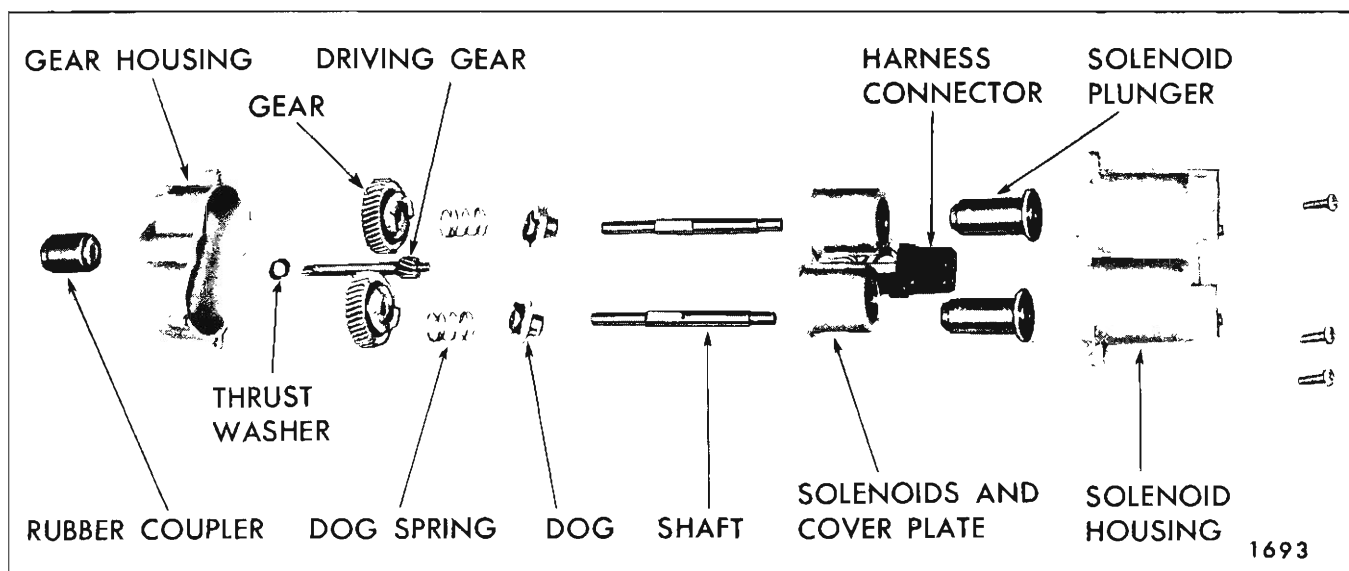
H9—Exploded View of Four-Way Seat Transmission
